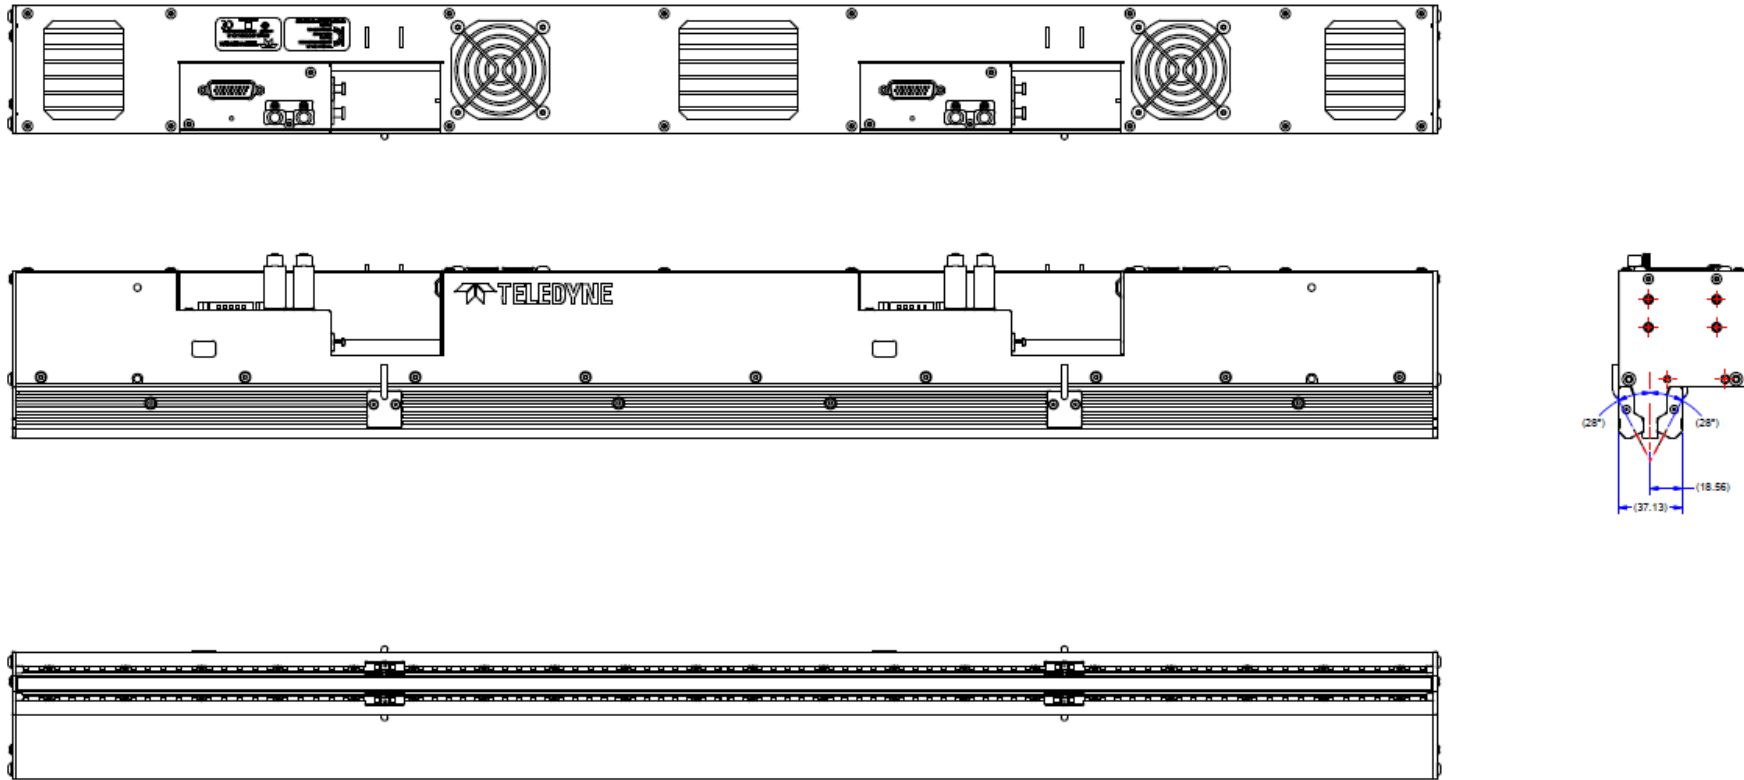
AX-FM-08A/B12H-00 800mm CIS Mechanical Drawing (with optional LEDs)
